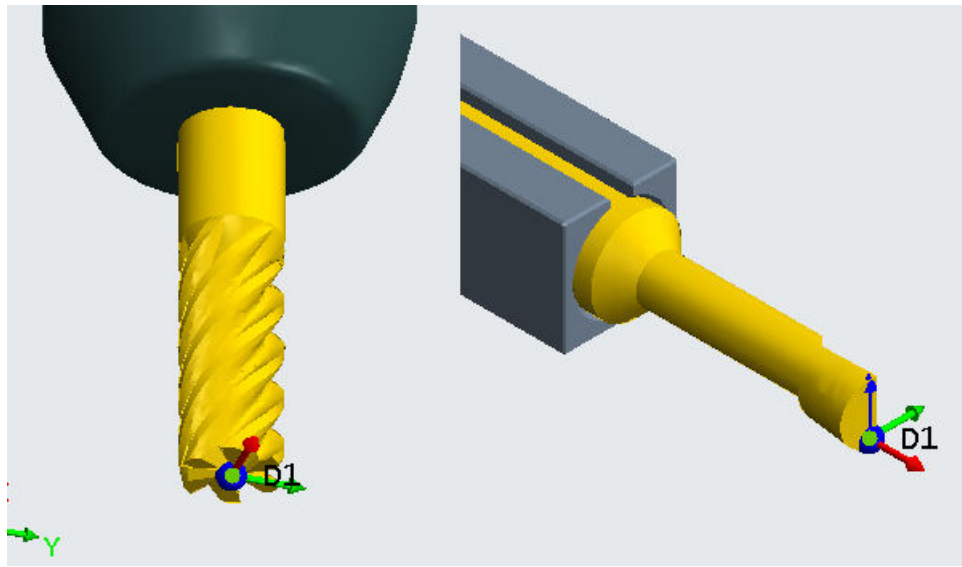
Cutting edge D1 positioned on tool geometry of milling cutter or turning tool
